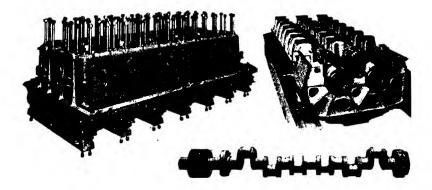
Cylinder block, crankcase and crankshaft of 2200 h.p. Sulzer engine.
